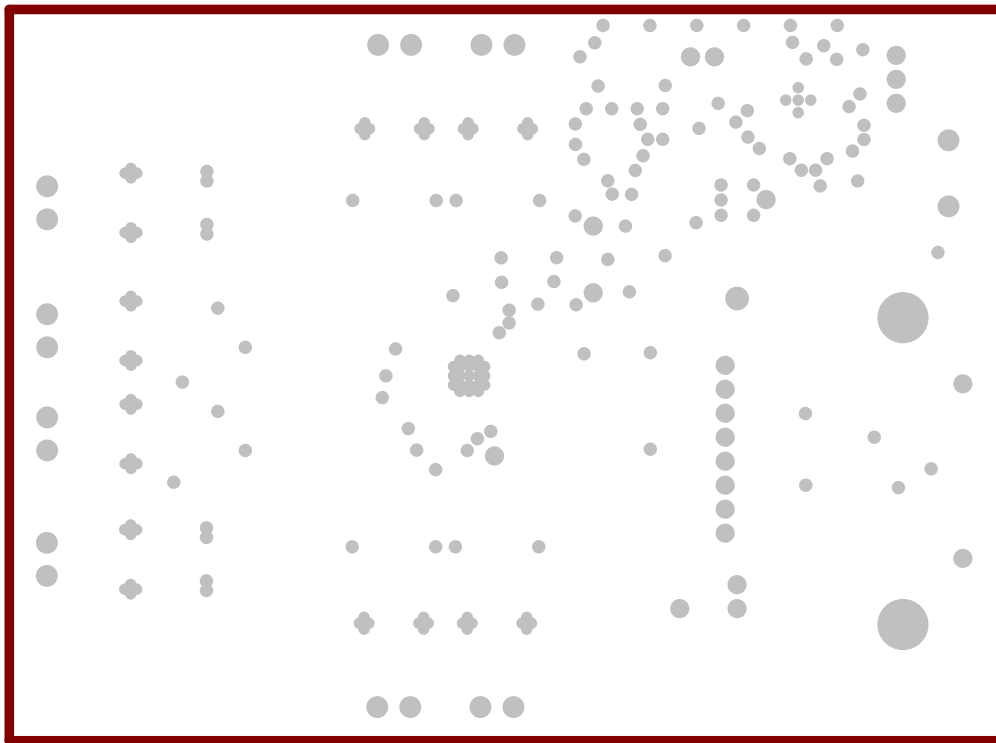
ADS125H18 EVM PCB Layout - Ground Layer 2
